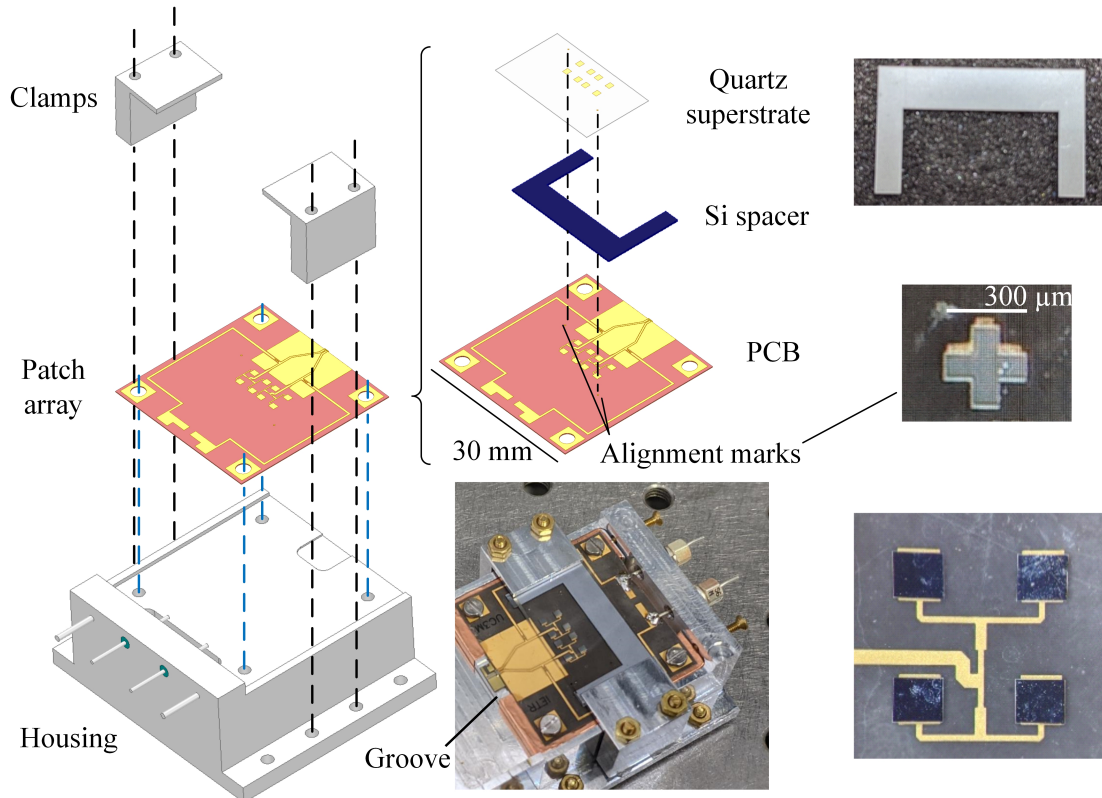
Exploded view of the assembled prototype with the different parts detailed.
